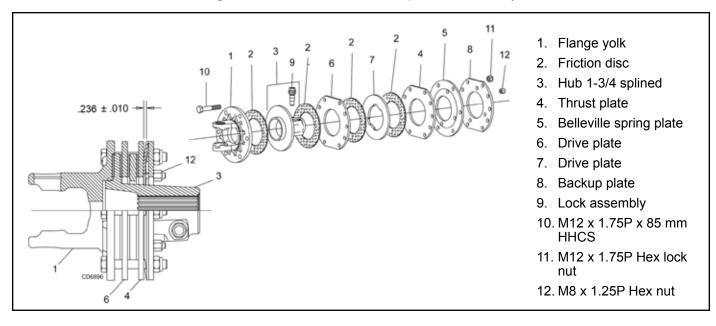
BW10.72 & BW15.72 Slip Clutch Assembly
